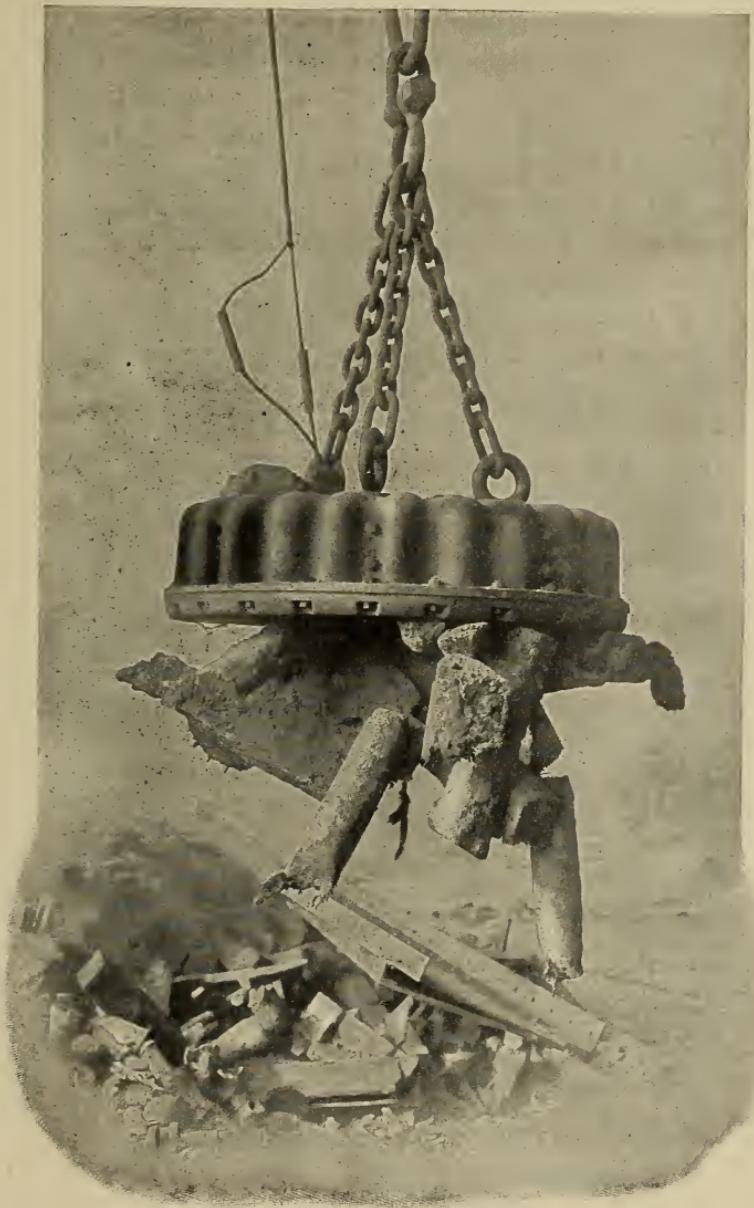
Tractive Magnet built by Cutler Hammer Clutch Co
